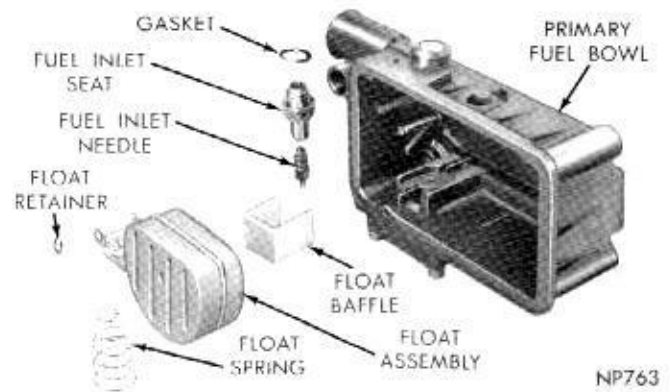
Float, Needle, Seat and Baffle (Exploded View)
